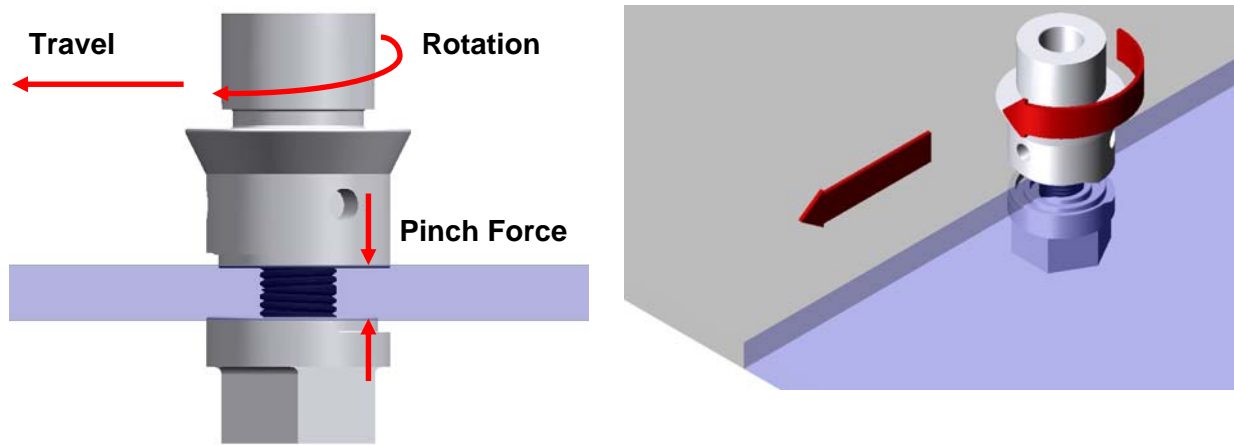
A depiction of a self-reacting friction stir weld of a butt joint.
